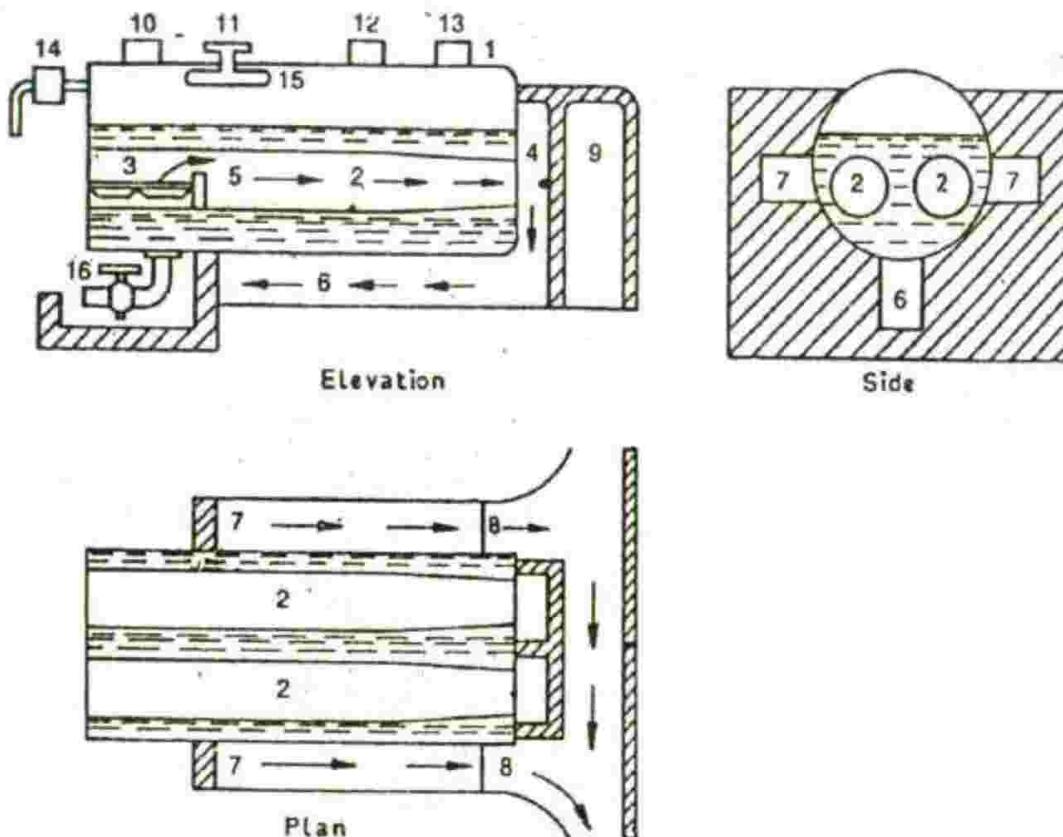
Elevation, side and plan of lancashire boiler.
